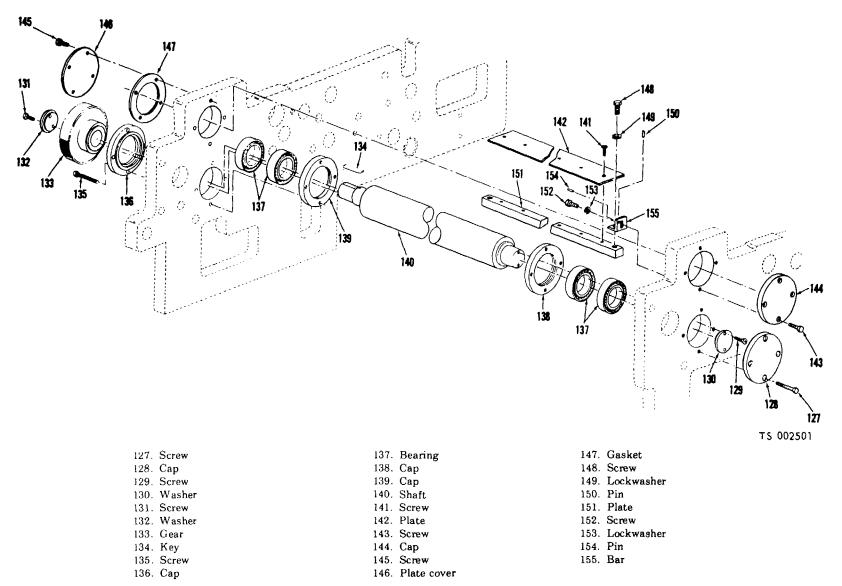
Trolley, paper guide and nipping roller alignment assembly (Sheet 5 of 7).
